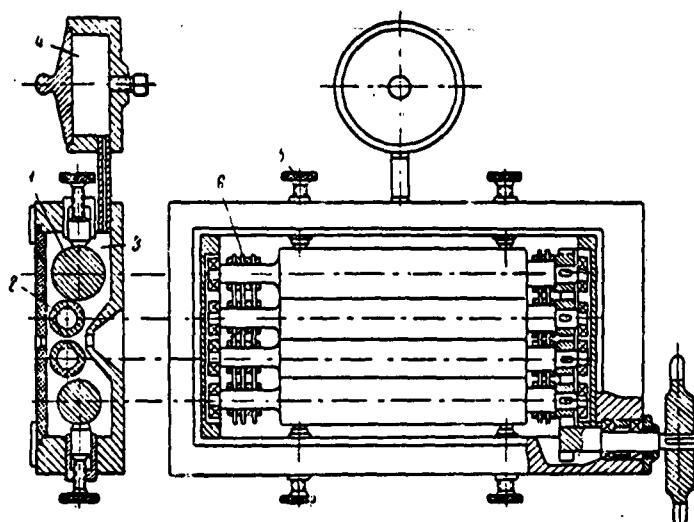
Varnishing machine. 1) Steel rollers; 2) rubber-coated rollers; 3) housing; 4) tank; 5) adjusting screws; 6) gears.
